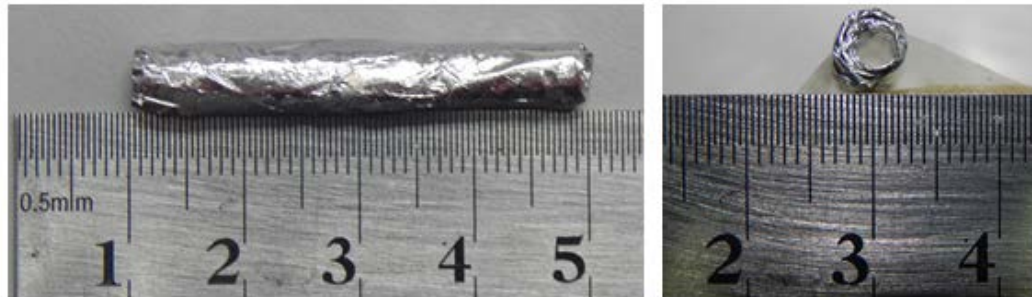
Simple rolled-up Aluminium sheet mould of diameter 3.0mm.
